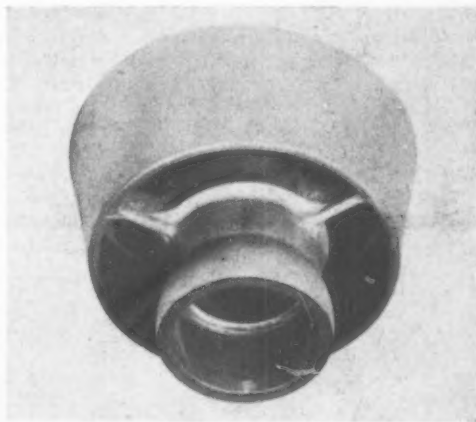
Flame Tube Head and Swirler Assembly Copper-brazed in Hydrogen
